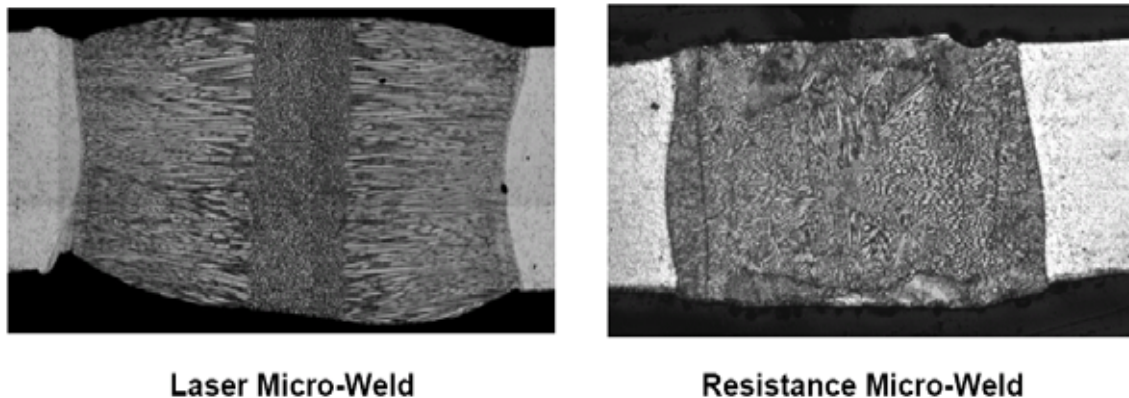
Fusion weld cross-section for 316LVM SS [3,4]
